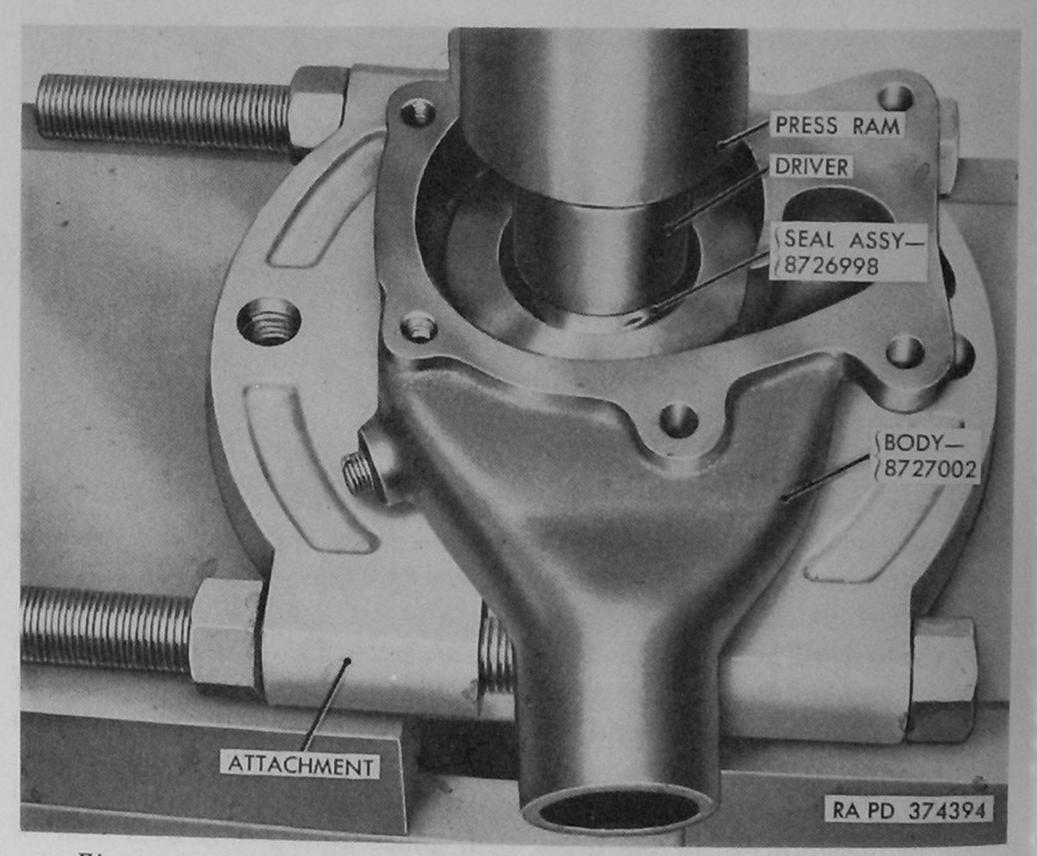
Installing water pump seal assembly—engine assembly 8726920.
